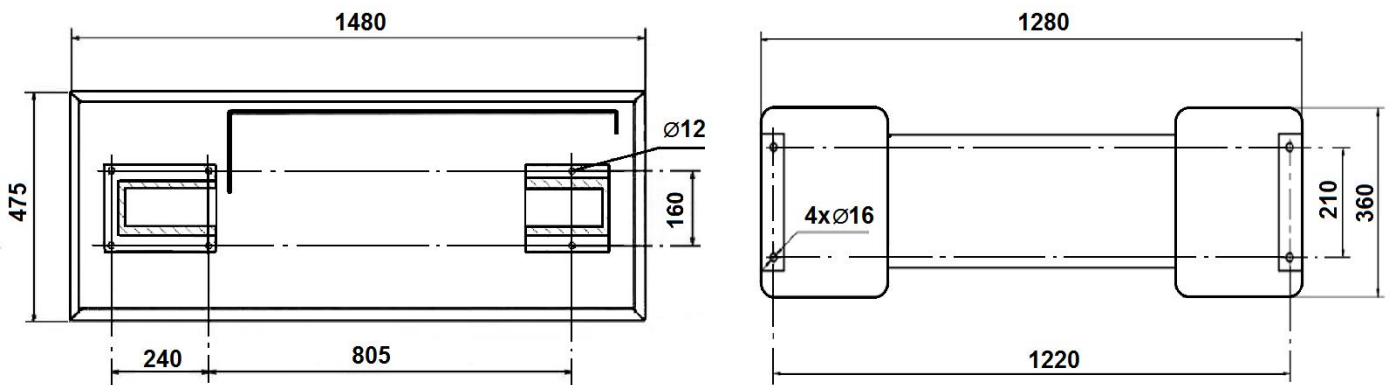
Lathe Bed (left) & Stand (right) anchor bolt pattern
